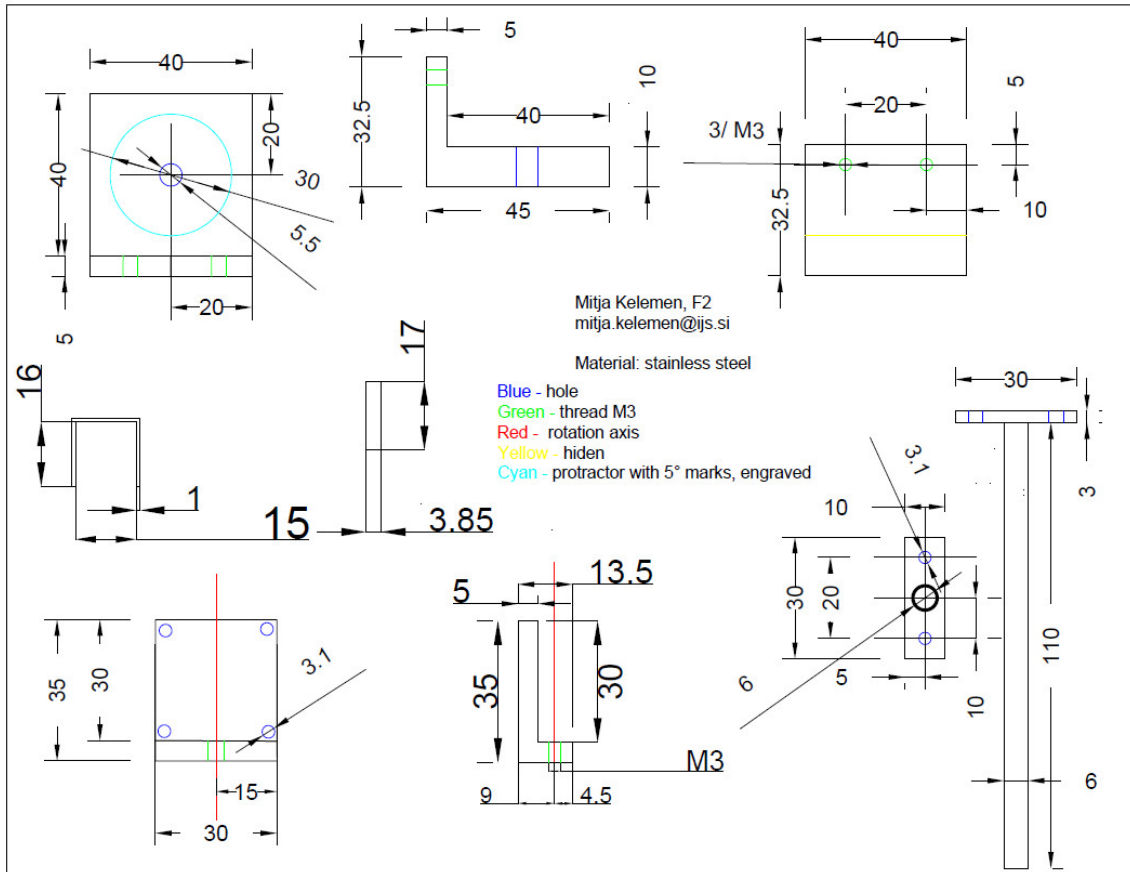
Technical drawing of rotating table and sample shield used in LEISA set-up.
